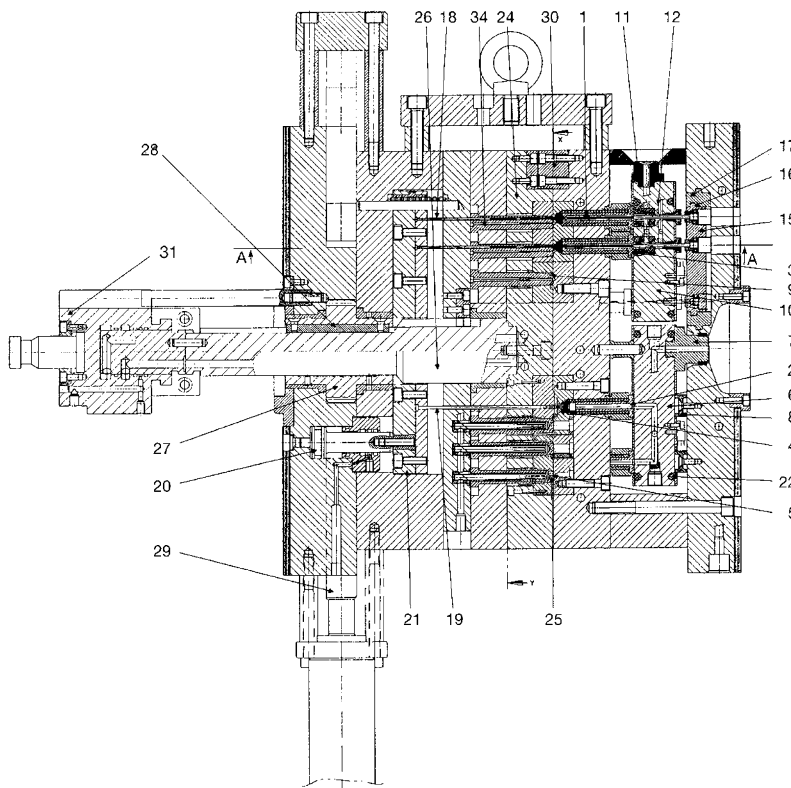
2 × 16-cavity two-component injection mold for microswitch covers
